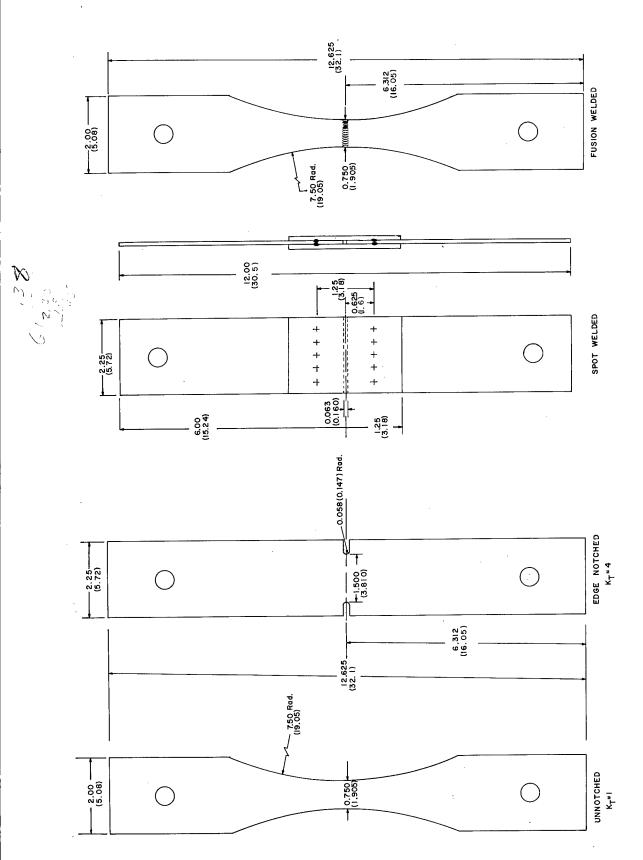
Fatigue specimens. All dimensions are in inches (centimeters).
